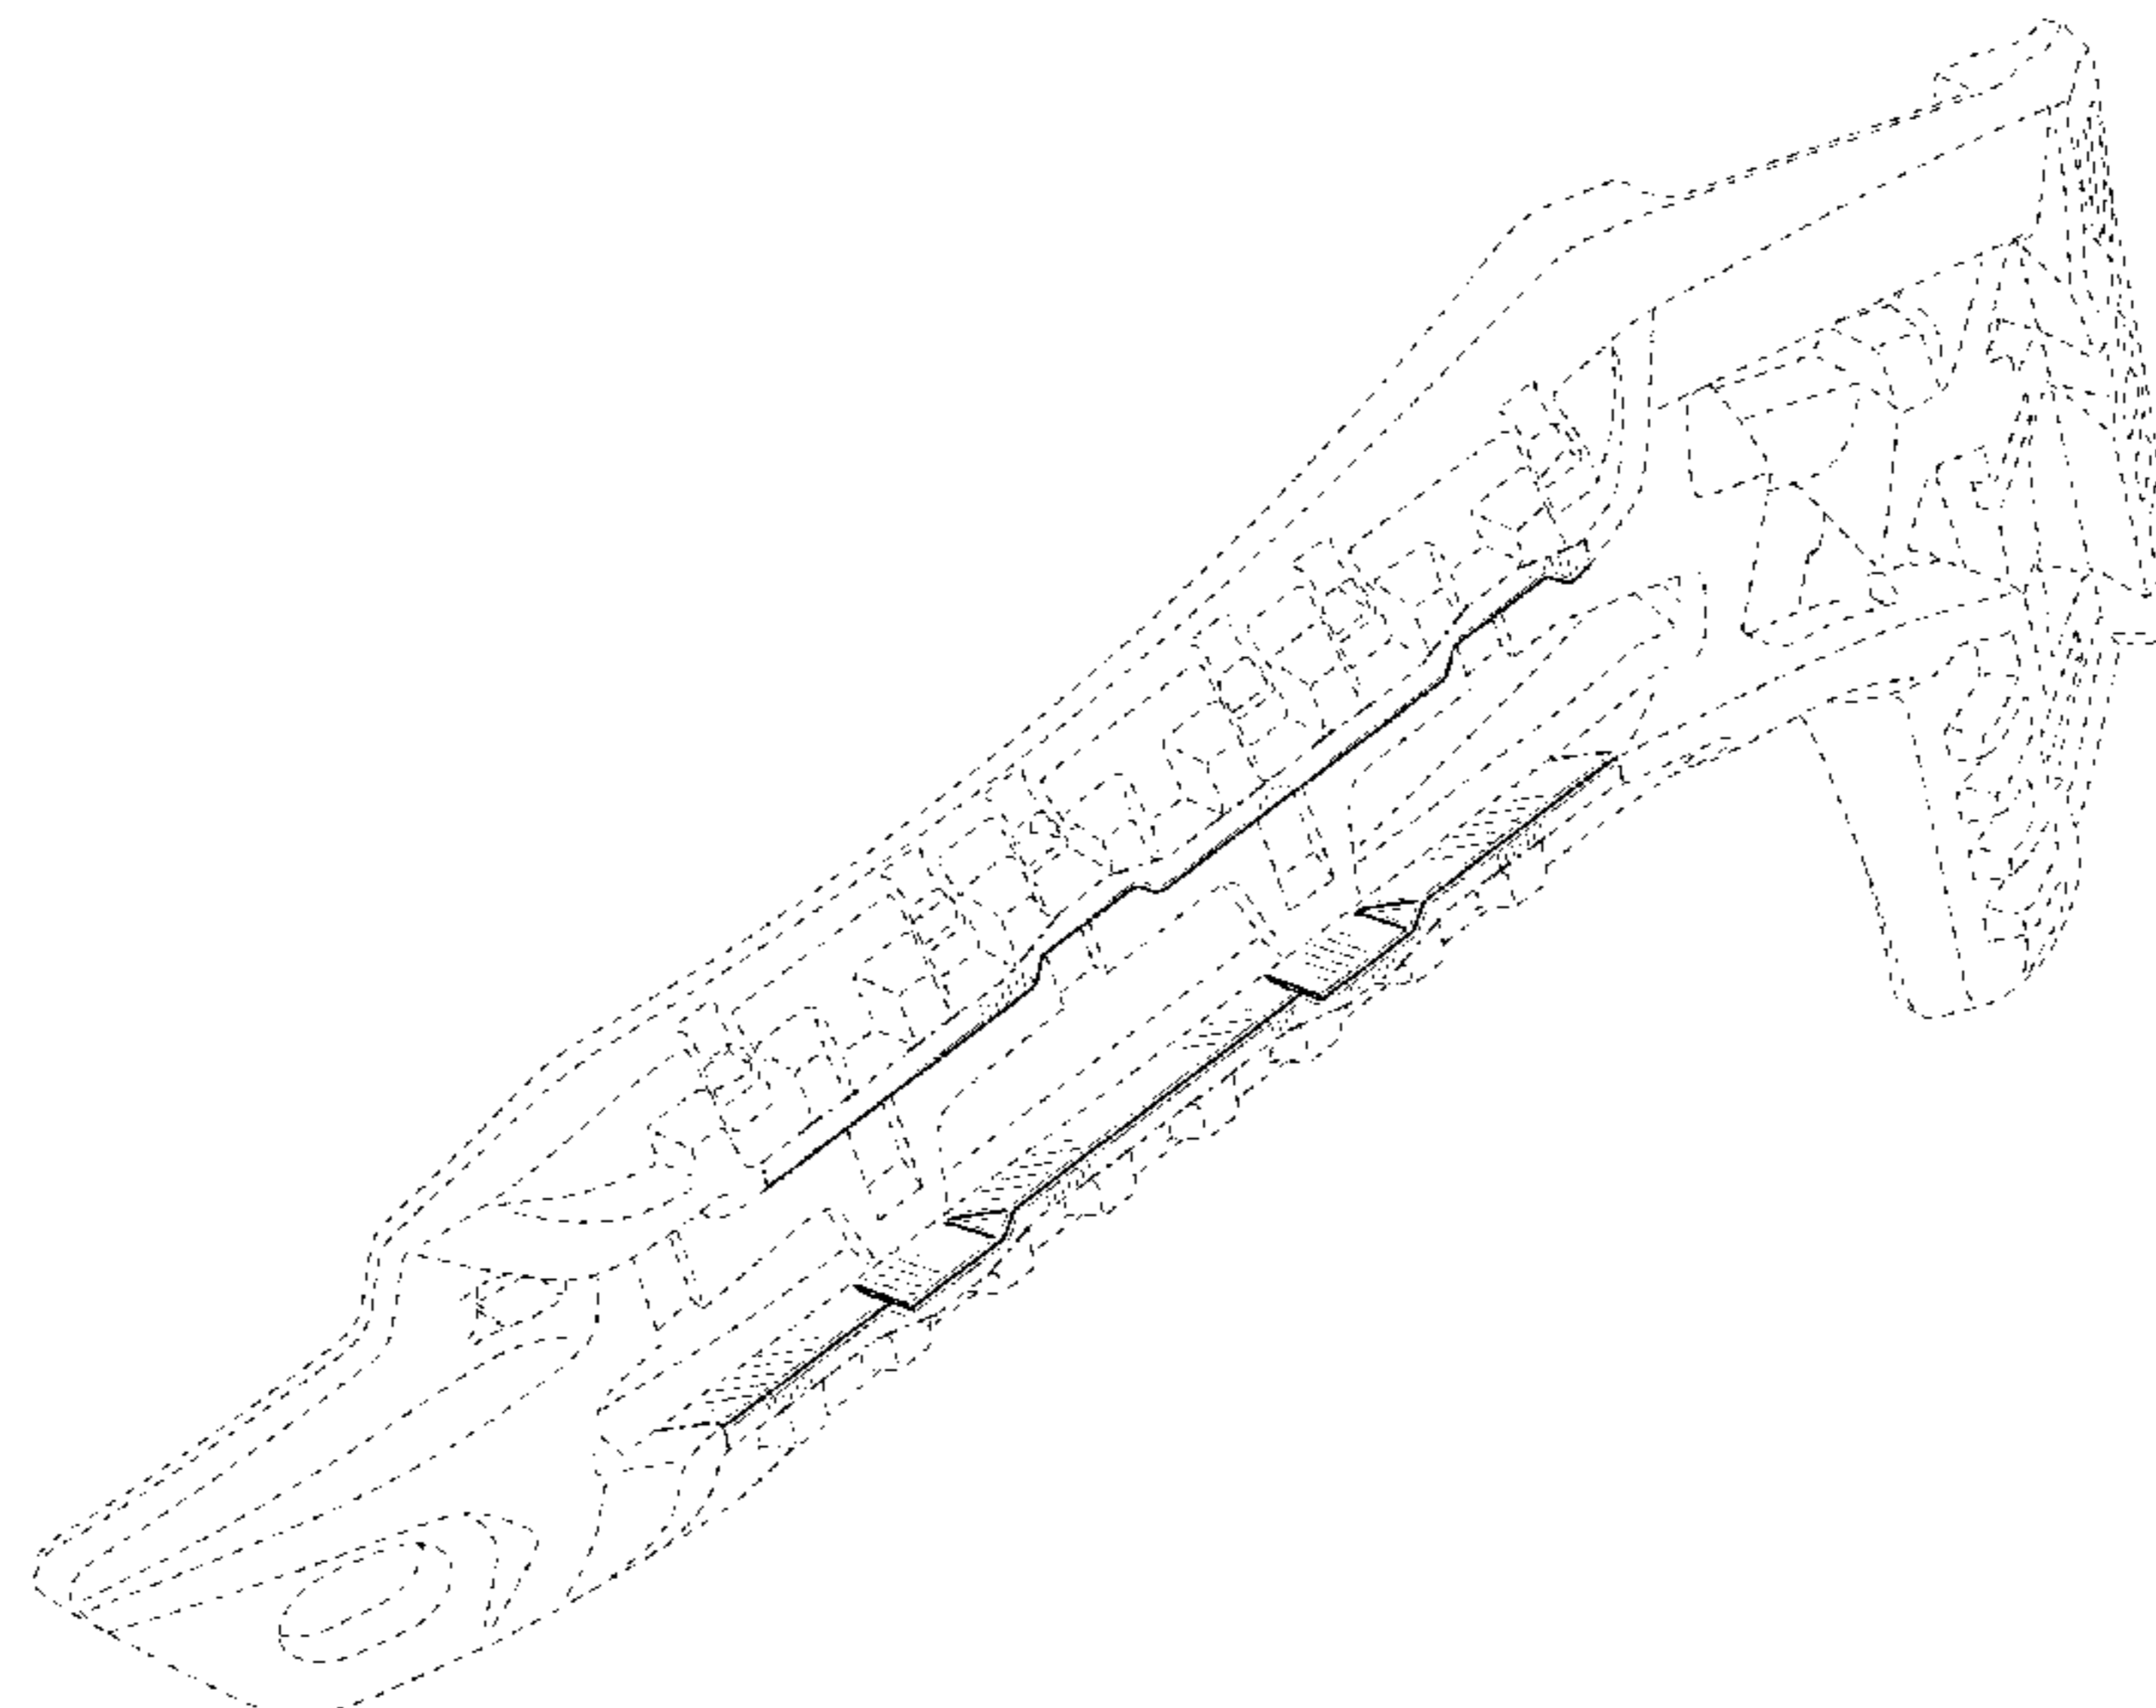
is a top, front, right side perspective view of a helmet rail showing our new design;
